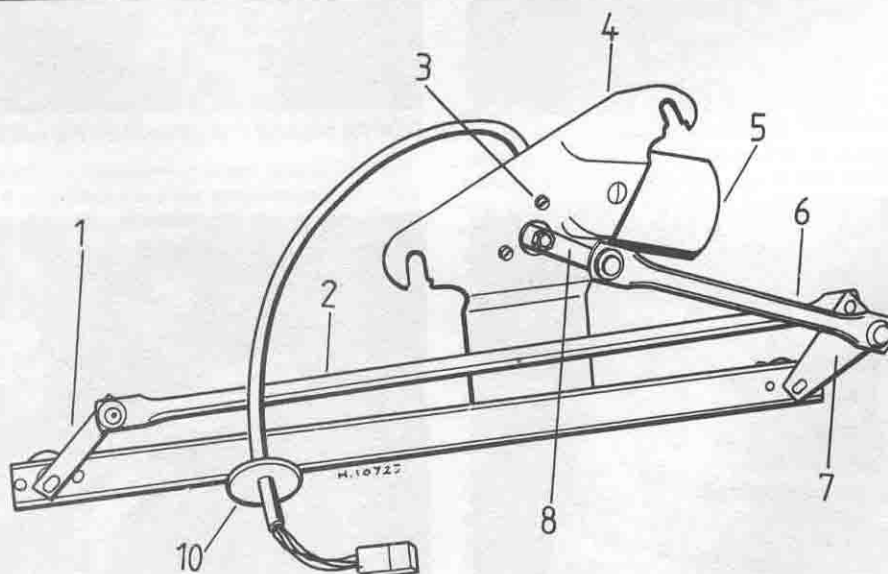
Windscreen wiper motor and mechanism (Sec 51)
